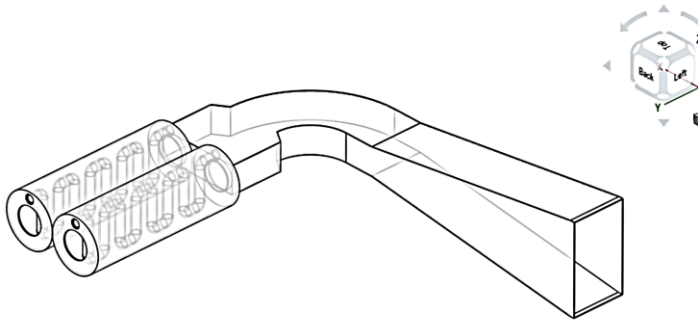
Isometric, Transparent View of the Assembly (air duct and heat exchanger)
